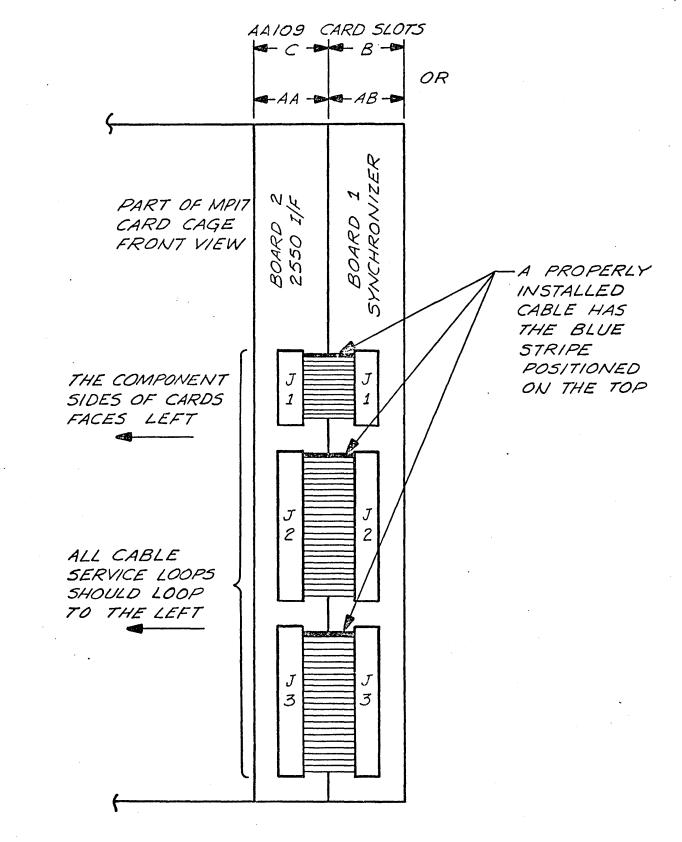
B-15. CARDS AND RIBBON CABLES INSTALLED IN MOS MACHINE
